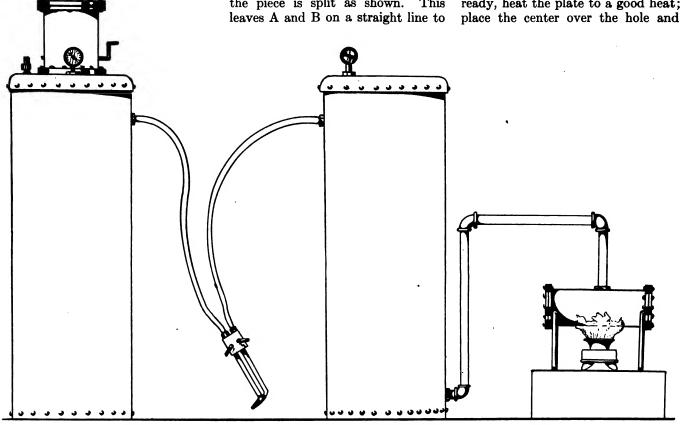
THE OXY-ACETYLENE OUTFIT COMPLETE WITH GENERATORS, TANKS AND BURNER OR TORCH
